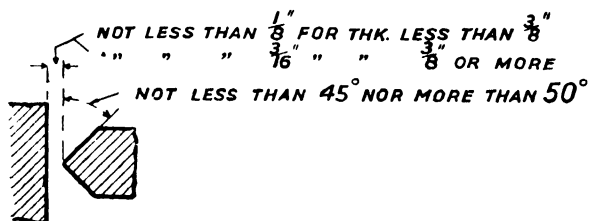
DOUBLE BEVEL BUTT WELD
